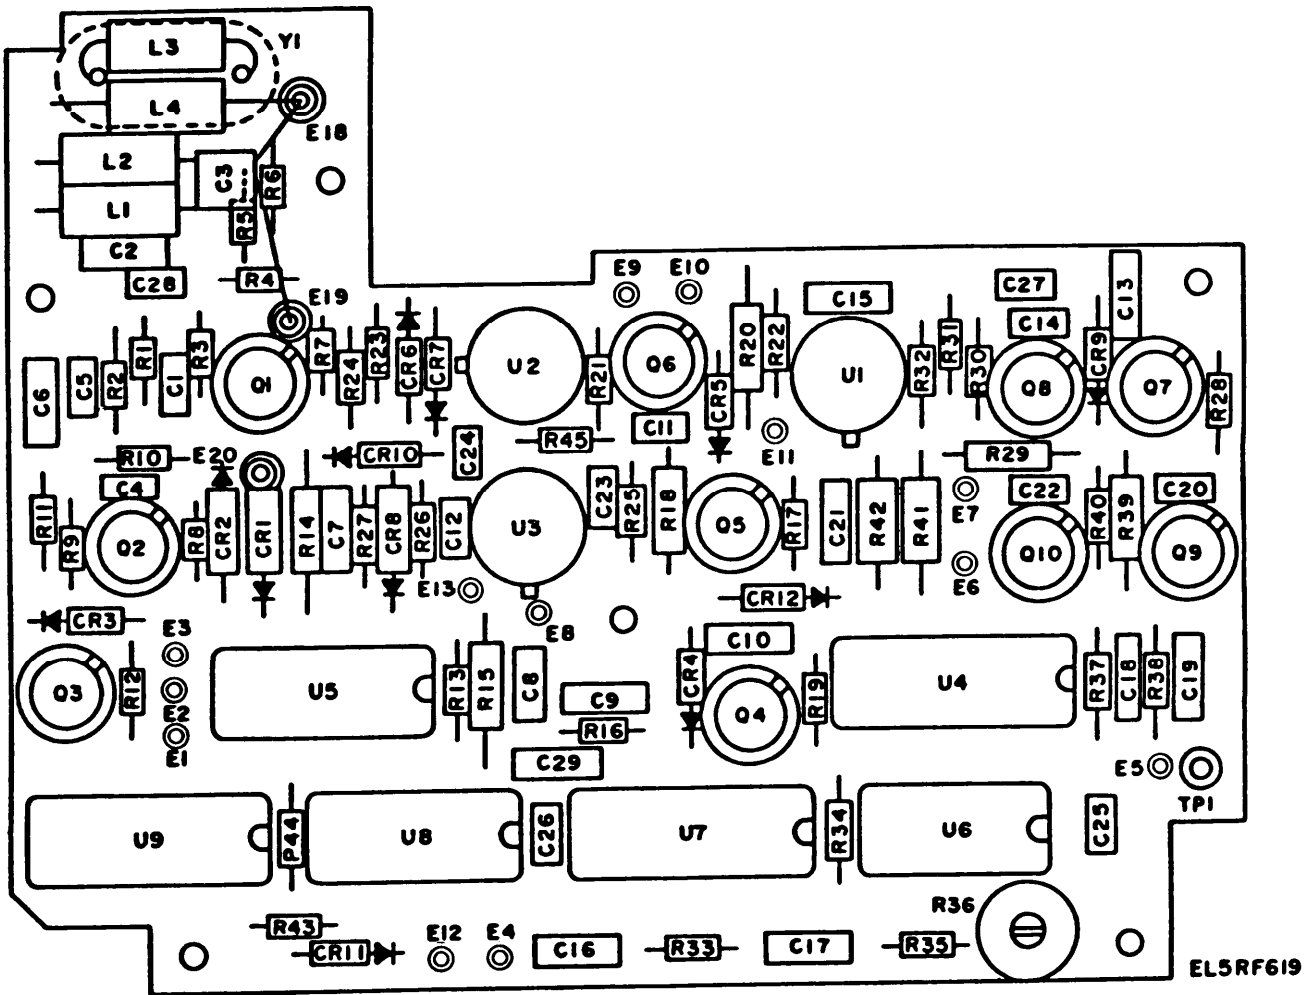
Pulse Form Restorer 1RE1A3 (SM-D-990510), Electrical Synchronizer Pcb 1RE1A3A4, Component Location Diagram.
